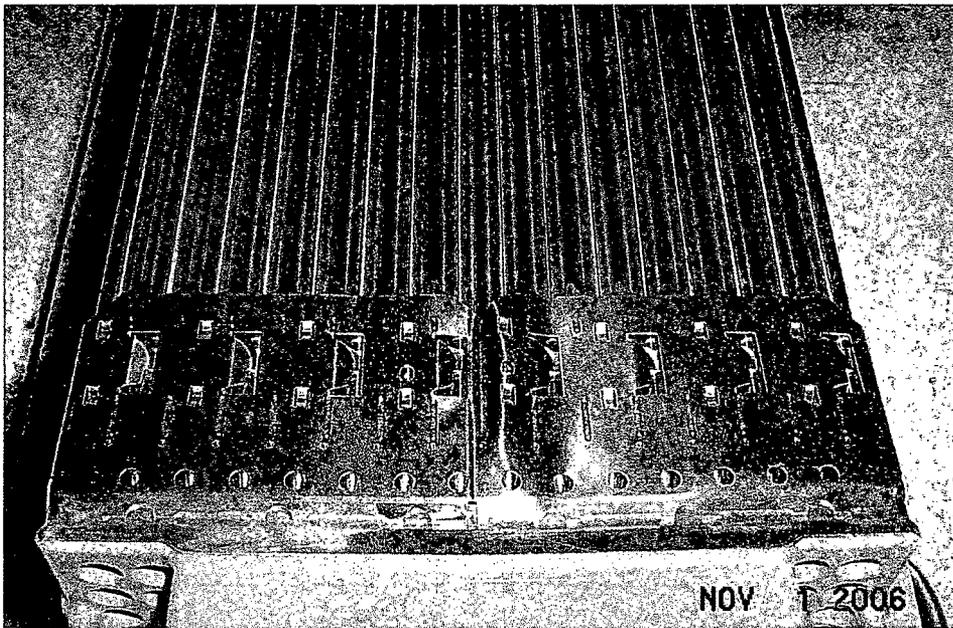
Lower end fitting assembly – guardian grid, low end fitting (Side view C)
